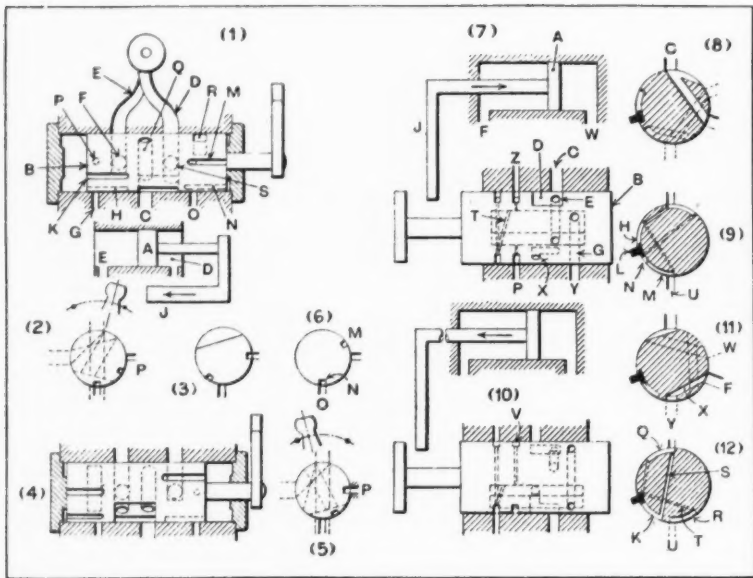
Valve Gear Arranged to Permit Accurate Stroke Reversal
